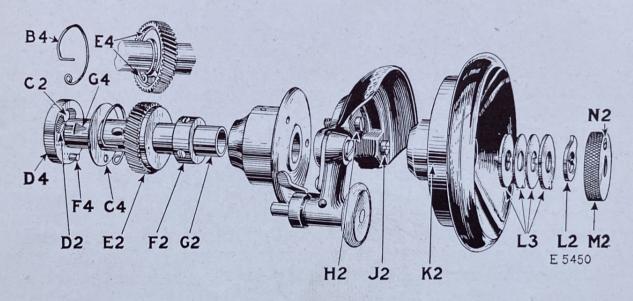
View of Parts Removed from the Machine Showing Clutch Roller, Clutch Spring and Shock Absorbing Spring
